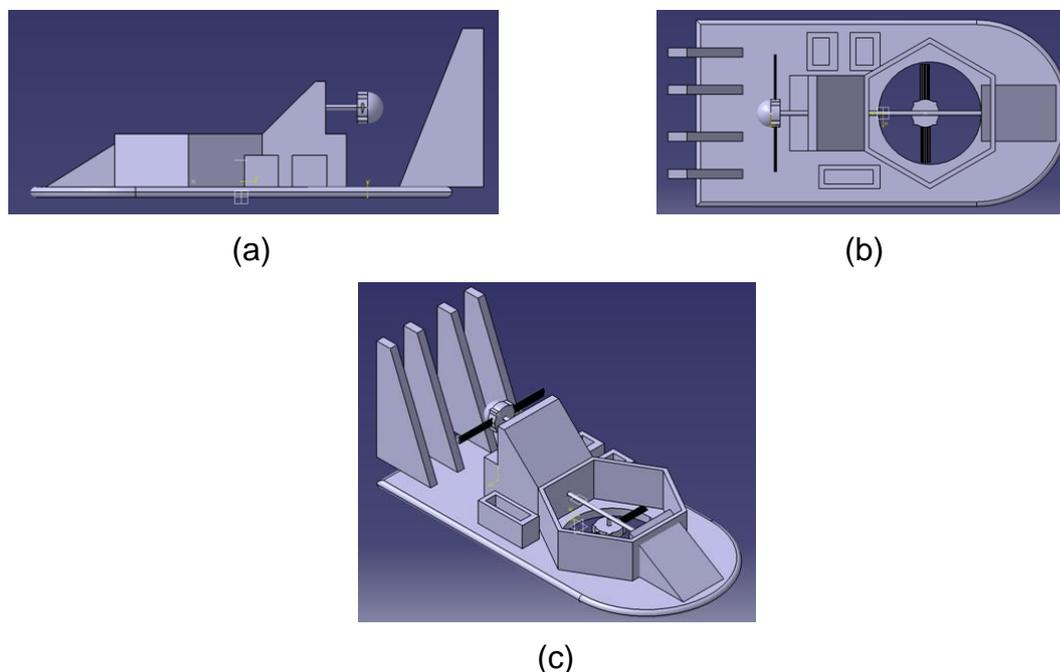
(a) Side view of Aerostatic craft; (b) top view of aerostatic craft; (c) isometric view of Aerostatic craft in CATIA V5R19 design
